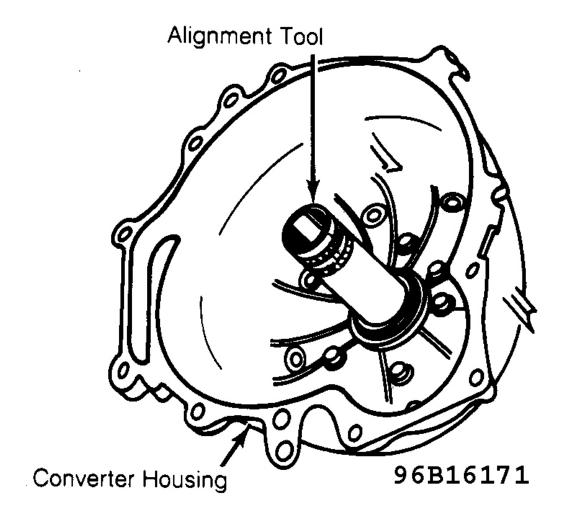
Front View of Converter Housing. Courtesy of FORD MOTOR CO.
